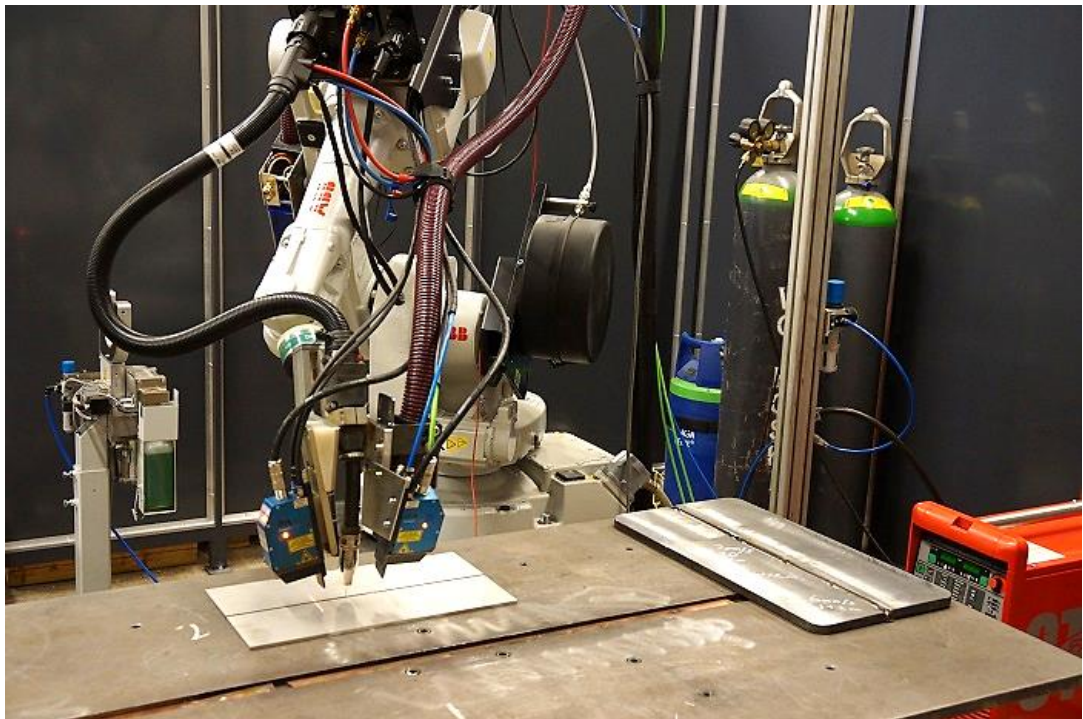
Adaptive welding station at Lappeenranta University of Technology.
